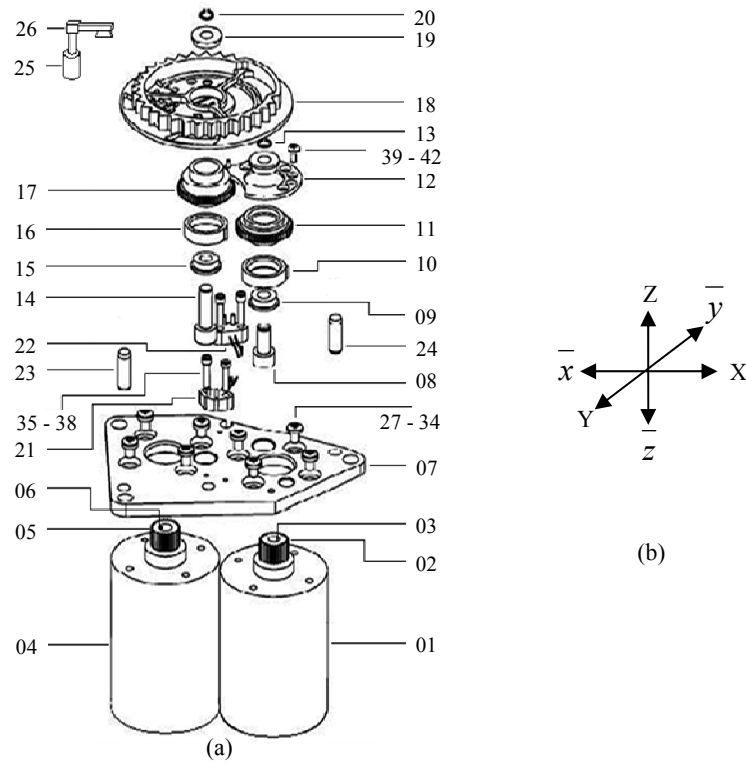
(a): An exploded view of the discriminator; 3.2(b): The three mutually perpendicular axes for assembly direction
